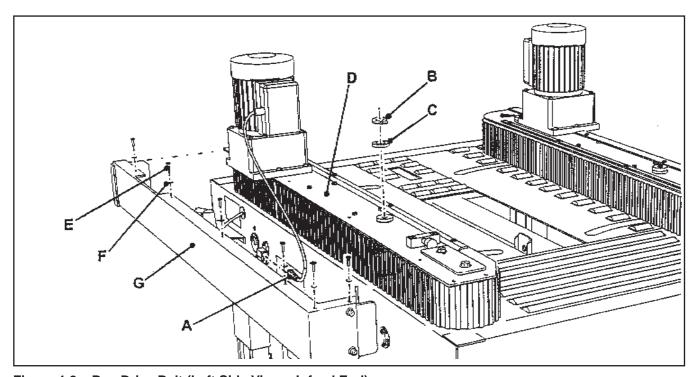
Box Drive Belt (Left Side View – Infeed End)
